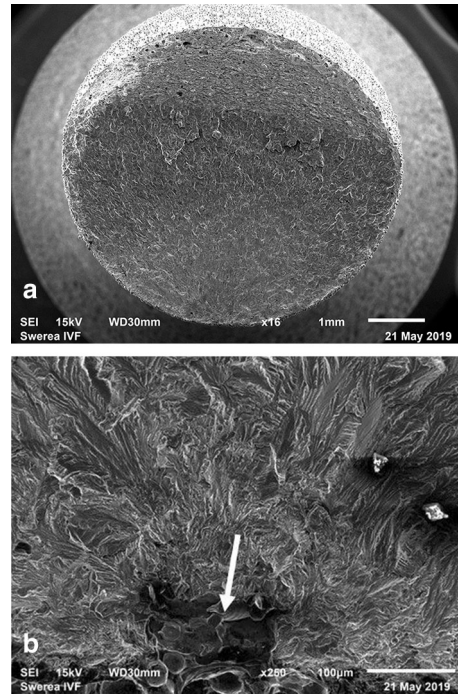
Fracture surface of an as-printed 316L stainless steel specimen manufactured using 50 µm layer thickness: a) possible crack initiation sites near the surface, arrow indicating surface of the specimen, and b) pores with ridges inside
